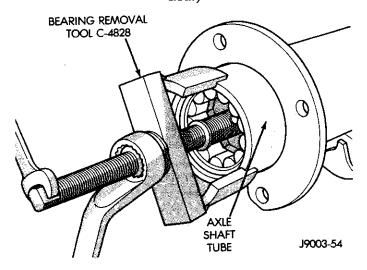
Axle Shaft Bearing Removal (9 1/4-Inch Ring Gear)
